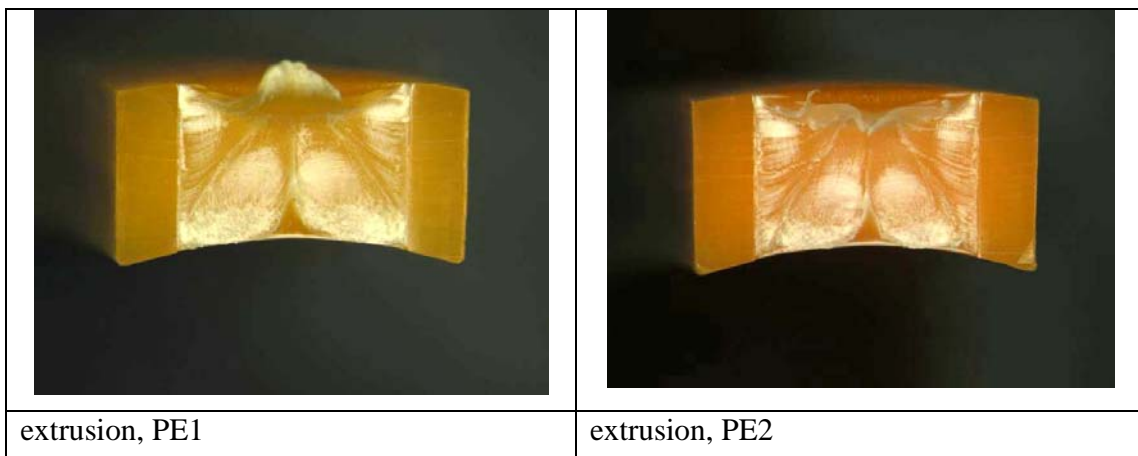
2NCT results (5,0 MPa at 176°F) of the injection moulded and extruded pipe specimens
